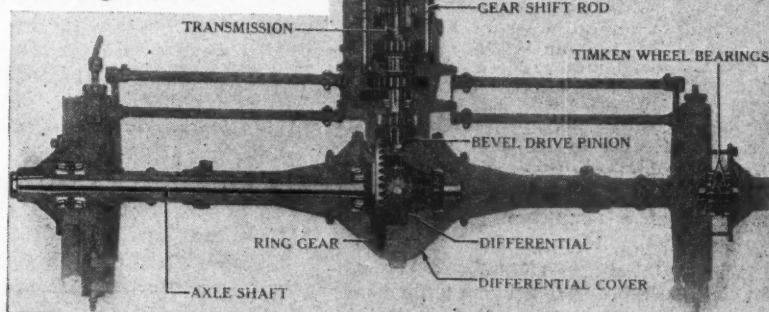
Cross sectional view of Studebaker rear axle and transmission assembly
